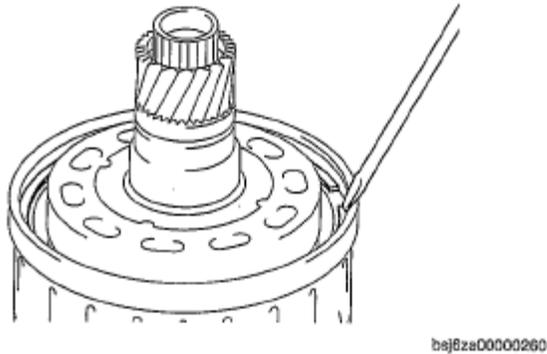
Removing Snap Ring From C3 Clutch Piston Component Using Screwdriver
